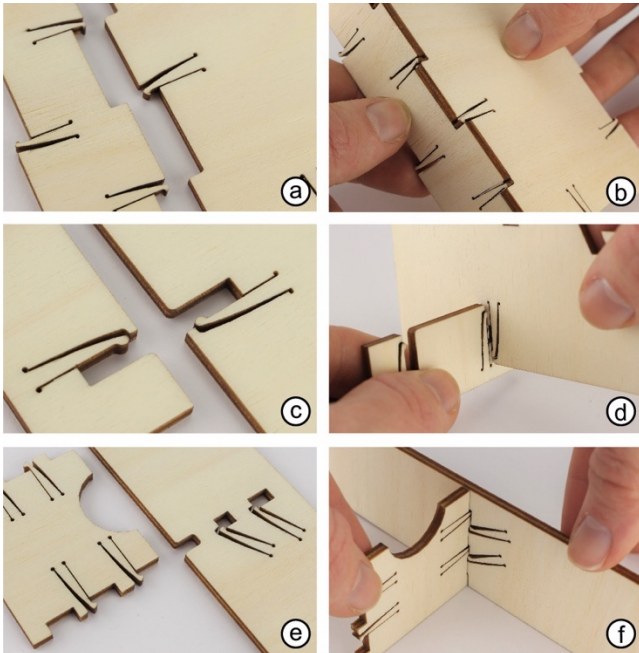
Cantilever spring versions of (a) finger joints and (b) how they assemble. (c,d) notch joints or cross joints and (e,f) T-joints.
